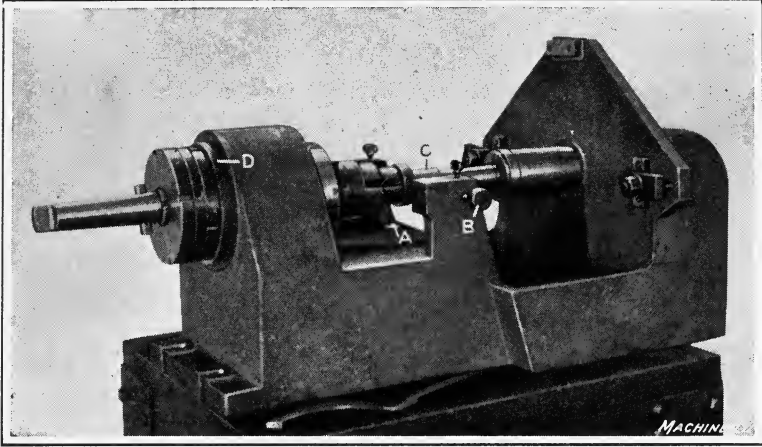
Jig and Boring-bar used in machining Case to Length and counter-boring Main Bearing Hole in Small End
